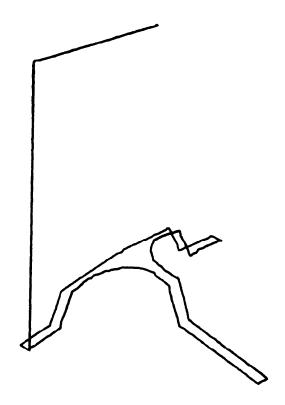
PLOT OF CUTTER PATH TO CUT BEARINGS INTO "T" DIE
